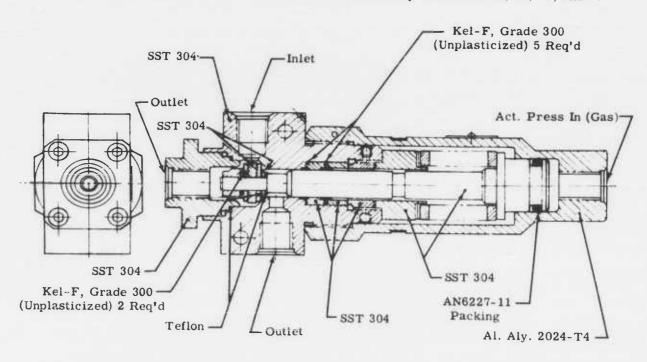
Cross Section - Valve Assembly - Three-Way Gas Operated 62-472-093
